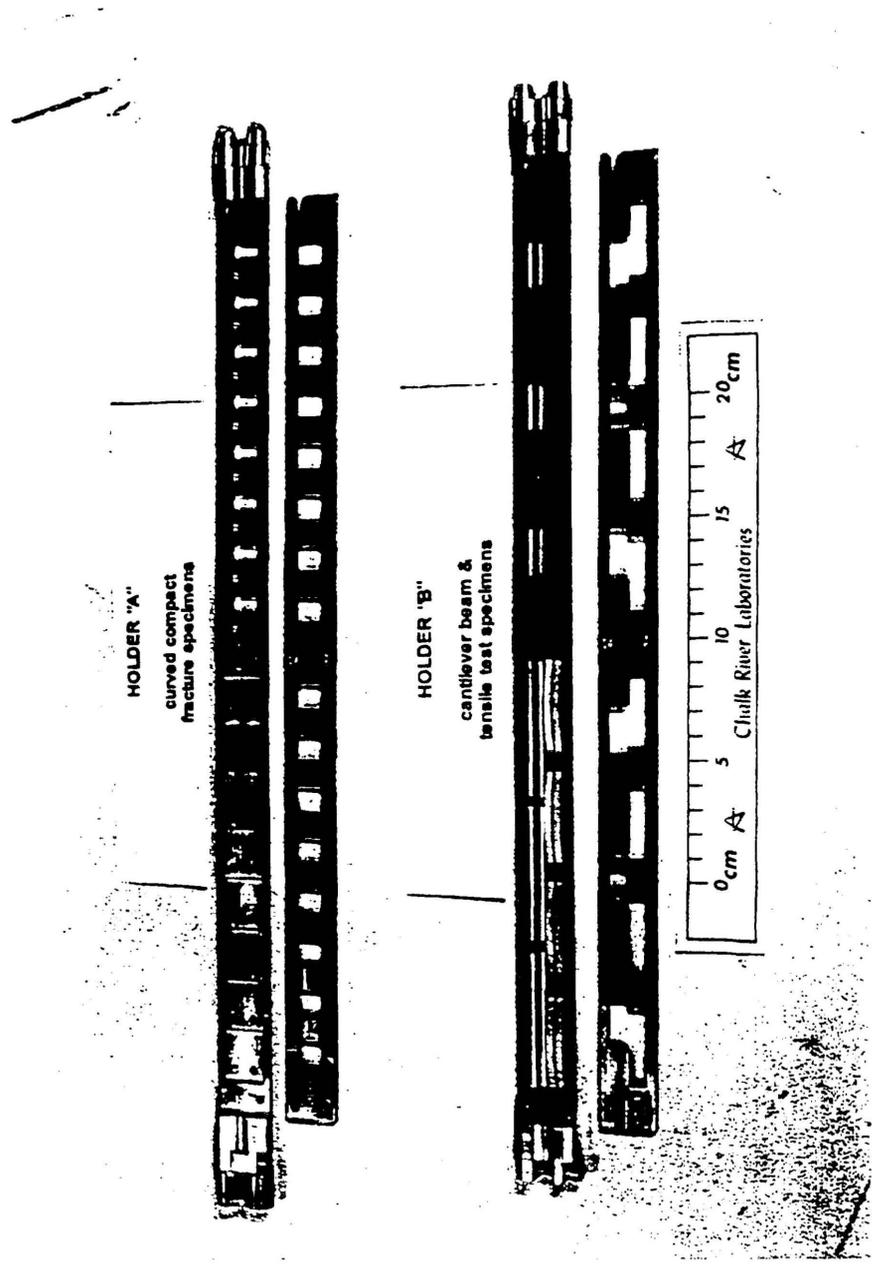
TYPICAL SPECIMEN HOLDER ASSEMBLY & SPECIMENS
